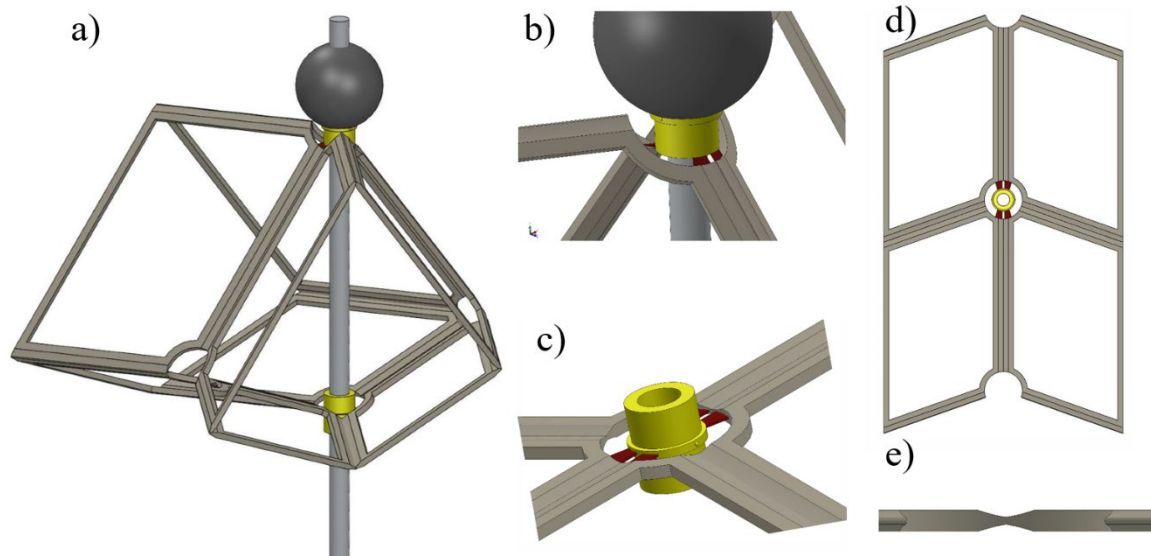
Details of the SMO structure with facet trimming: (a) 3D SMO structure with mass weight; (b-d) joint sections between the SMO structure and the rod; (d) top view of the facets with edge module trimming, and (e) side view of the crease trimming
